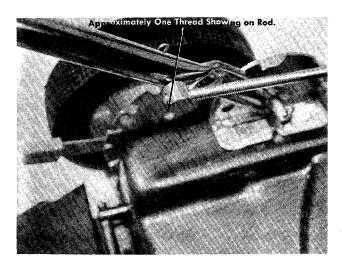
FIGURE F. CLUTCH ROD SETTING FOR THE SECOND LOWEST CUTTING HEIGHT
